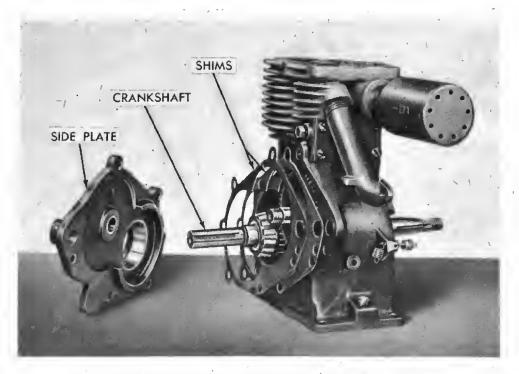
Shim Installation on Side Plate for Main Bearing Clearance
